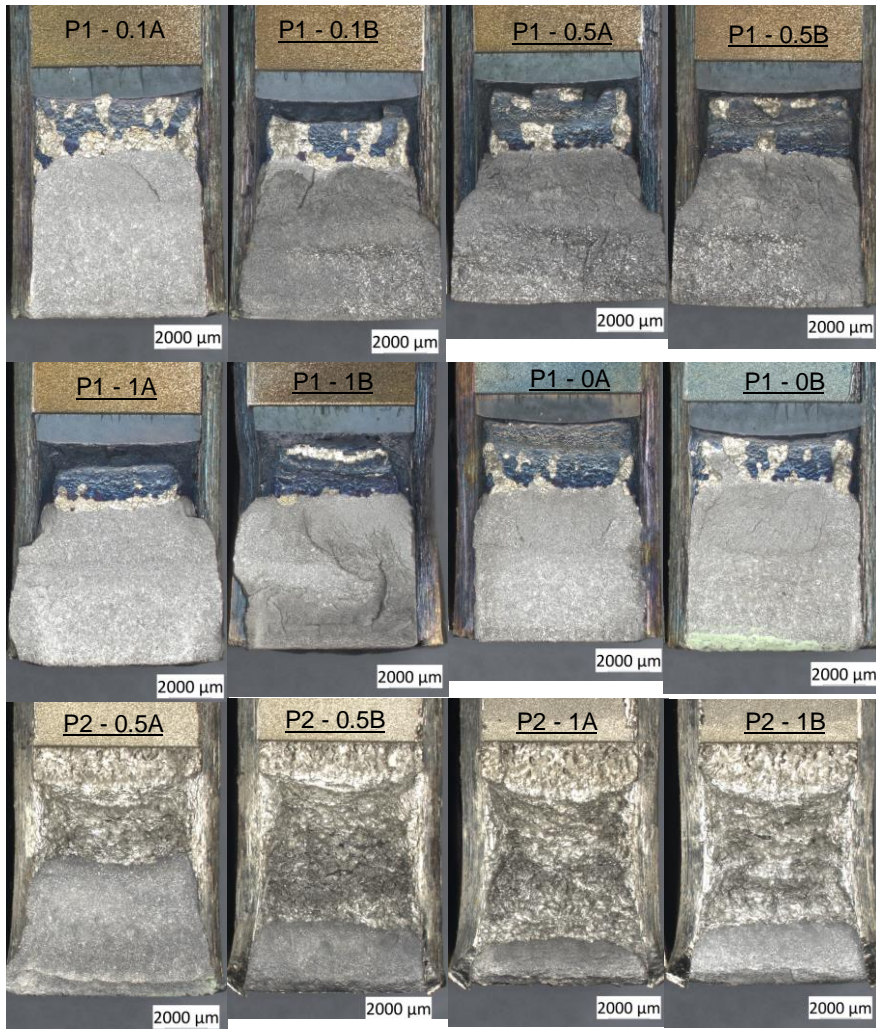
Fracture surfaces of the Ringhals specimens used for J-R curve testing.
